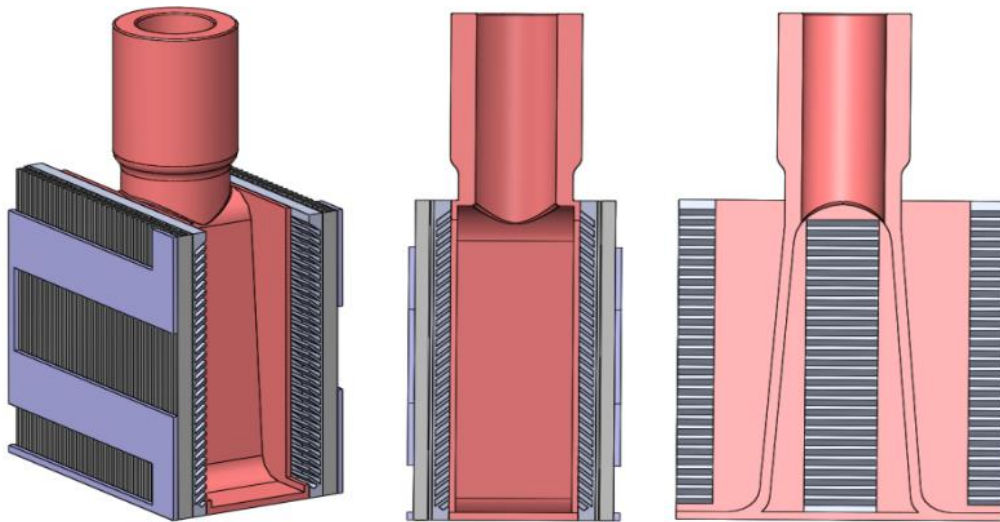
Pressure containment test coupon's CAD design (left); cross section view – right side (middle); cross section view – front side (right)
